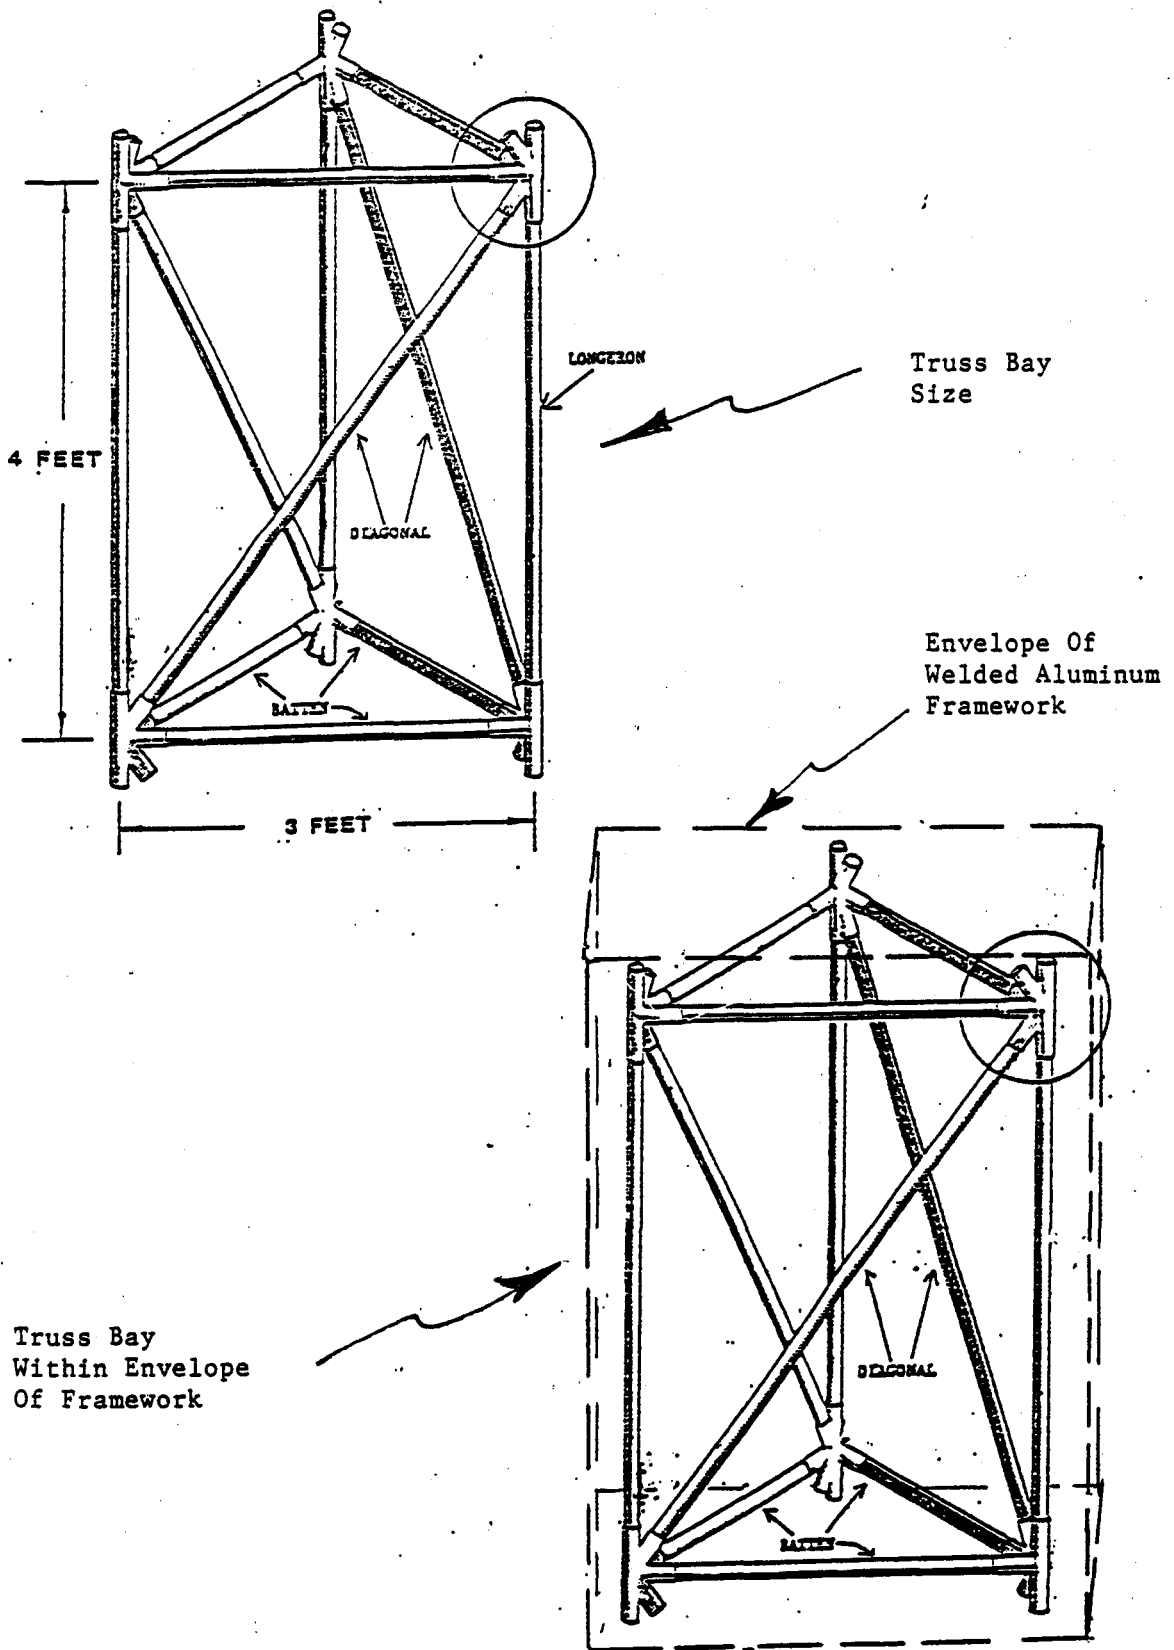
Method of Encapsulating Truss Bay in a Frame Fixture, for Assembly and Shipping
